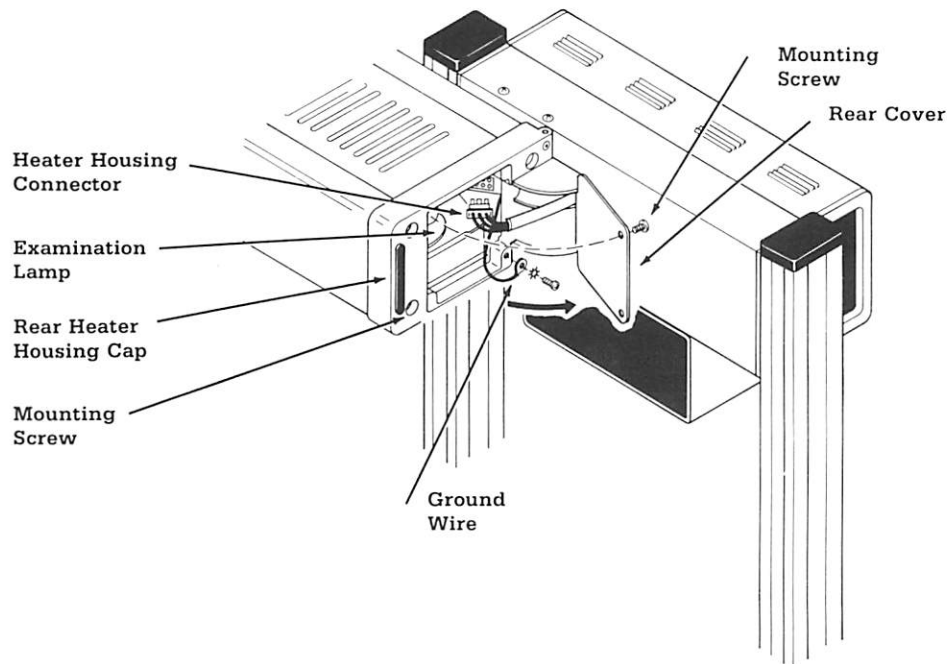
Removal of Back Cover from Heater/Lamp Assembly.
